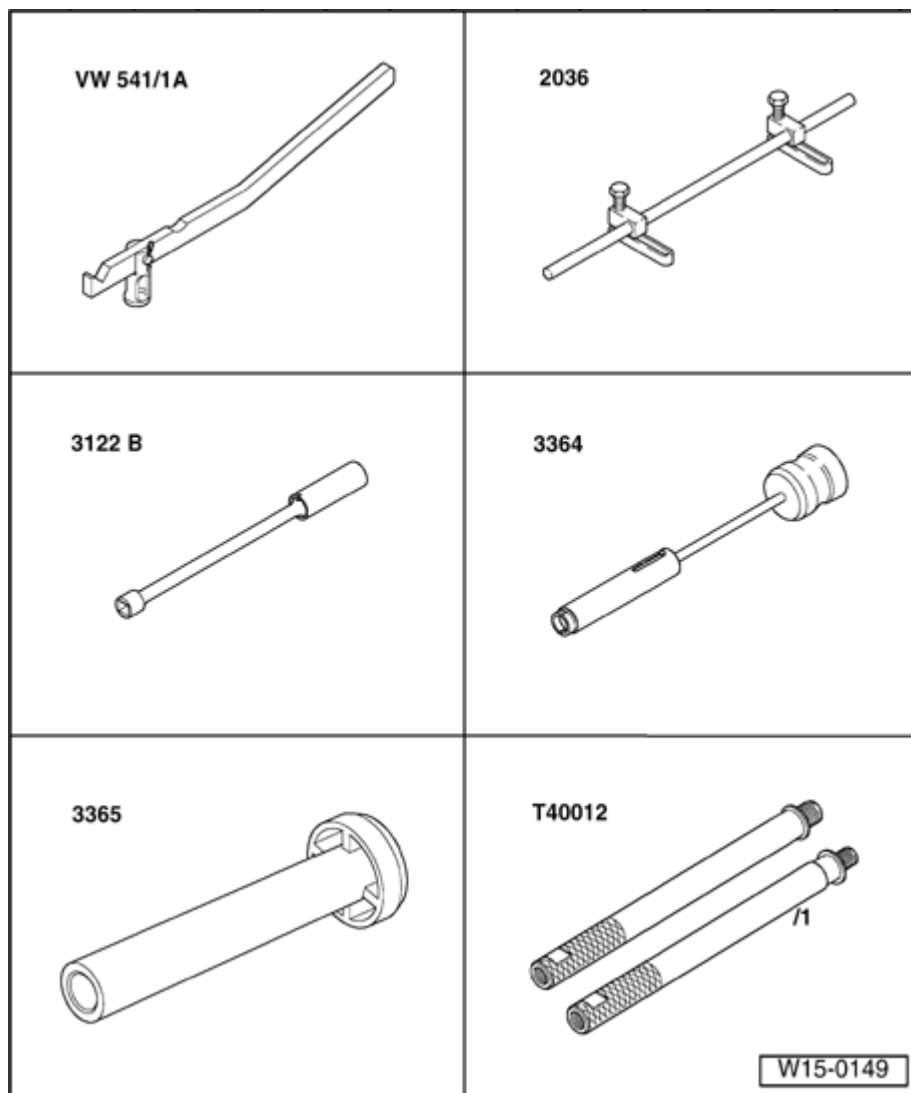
Identifying Special Tools - Valve Stem Seals, Replacing
